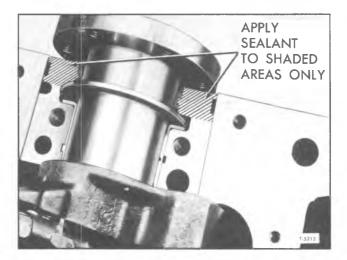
Sealer on Bearing Cap Area on Cylinder Block
